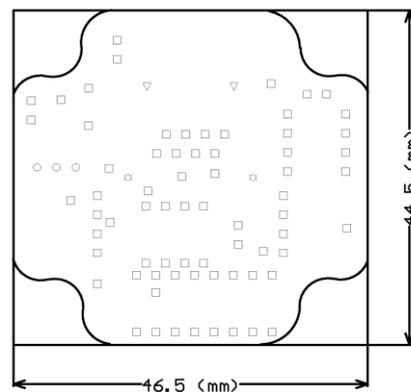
NEW SENSOR'S MAIN BOARD DRILL DRAWING LAYER.
